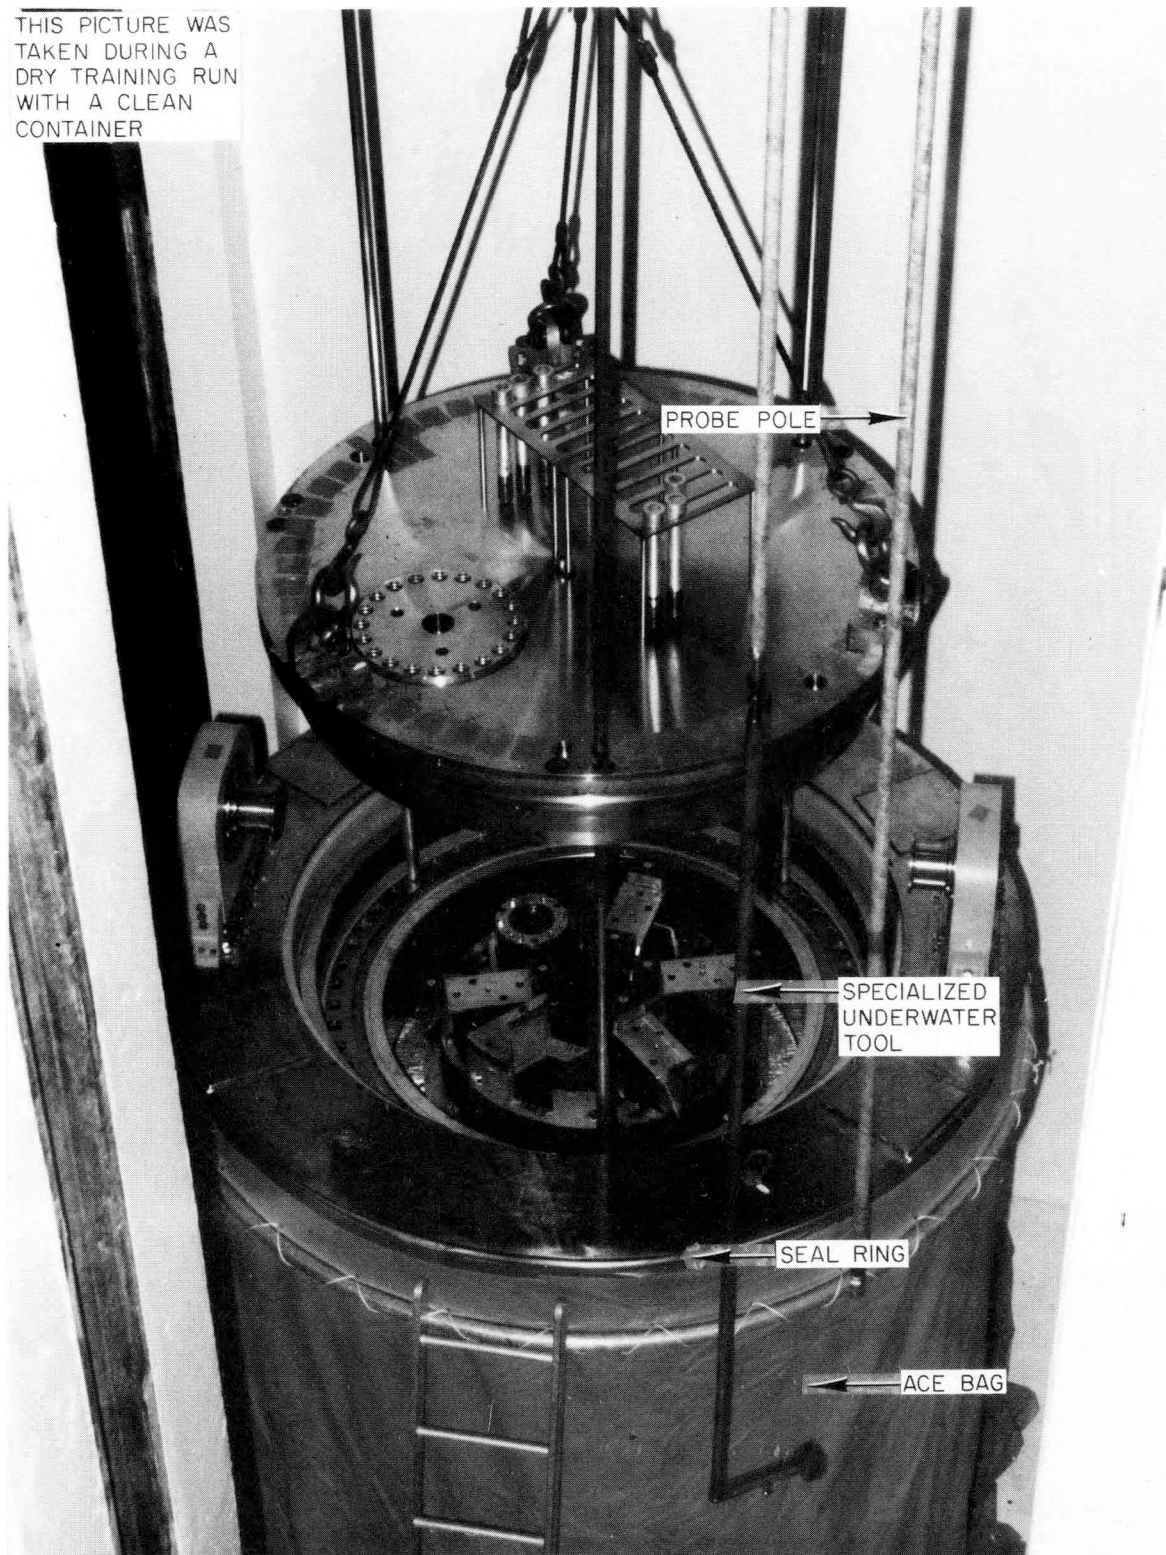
LWBR M-130 Underwater Tooling and Closure Head Removal
